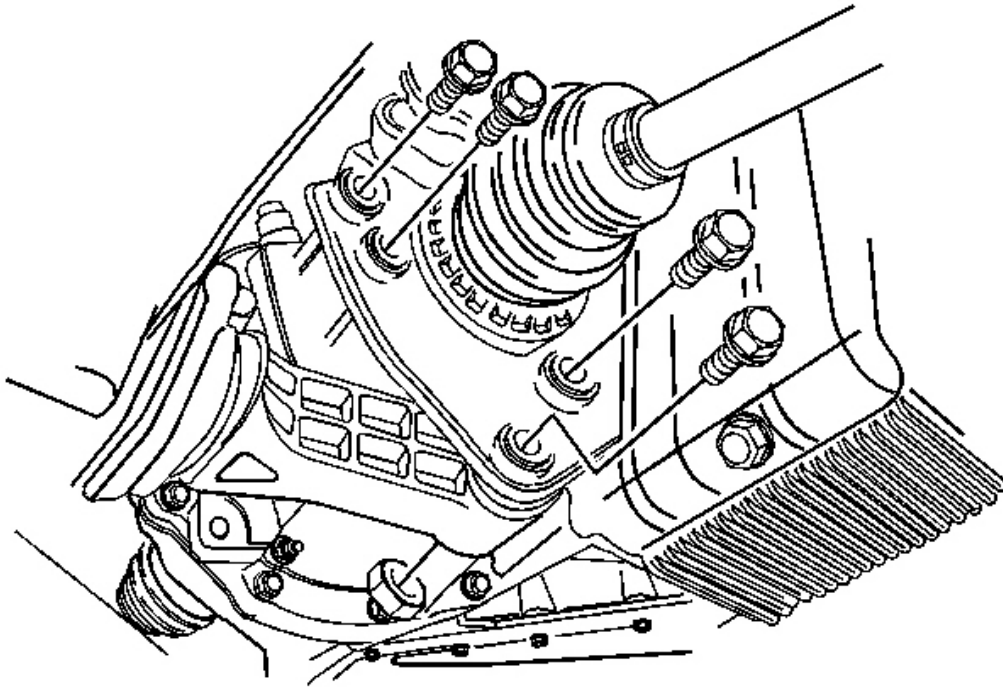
Removal Of Rear Mounting Bracket Bolts And Bracket
